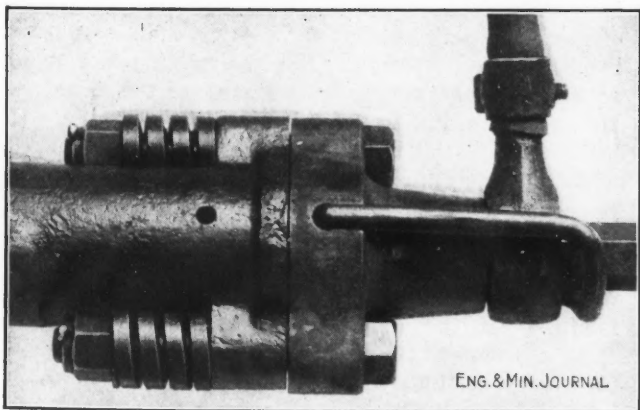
WATER CONNECTION HELD ON WITH SPRING
